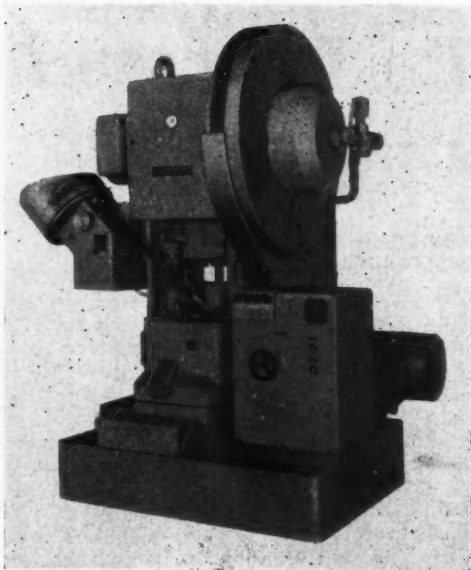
Following annealing, partly-formed nut blanks are delivered to this Hatebur type PKZ-1 multiple-station press for finish forming
